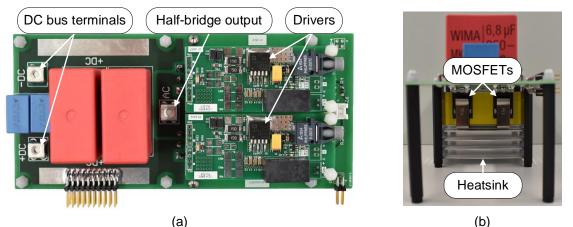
Universal half-birdge: top (a) and bottom (b) view
